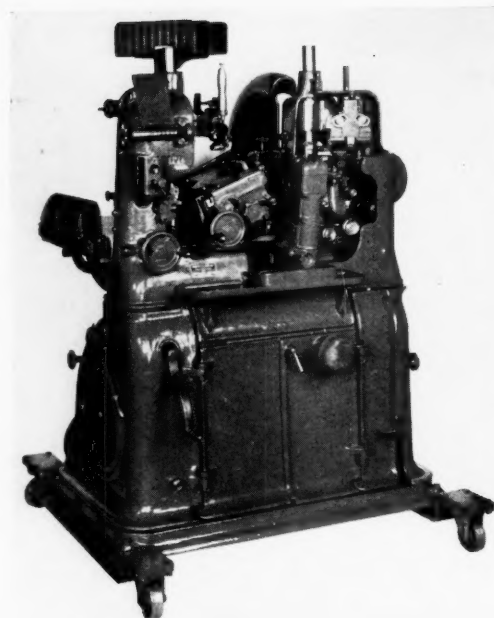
United Shoe Machinery Corp. Lasting Machine
